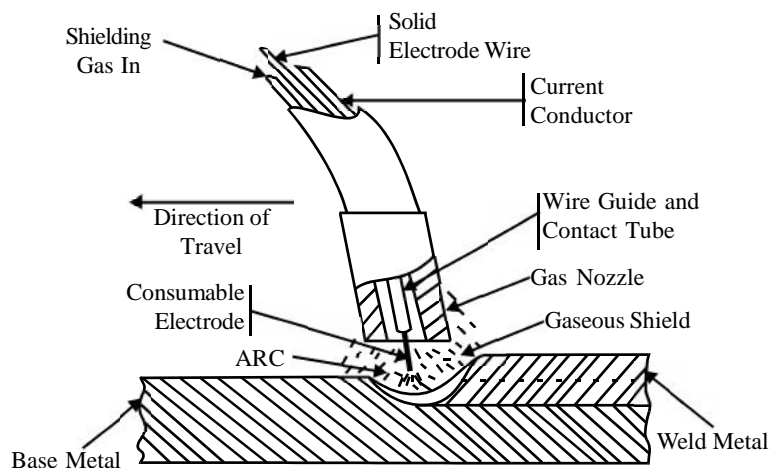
Metal Inert Gas (MIG) or GMAW welding process
